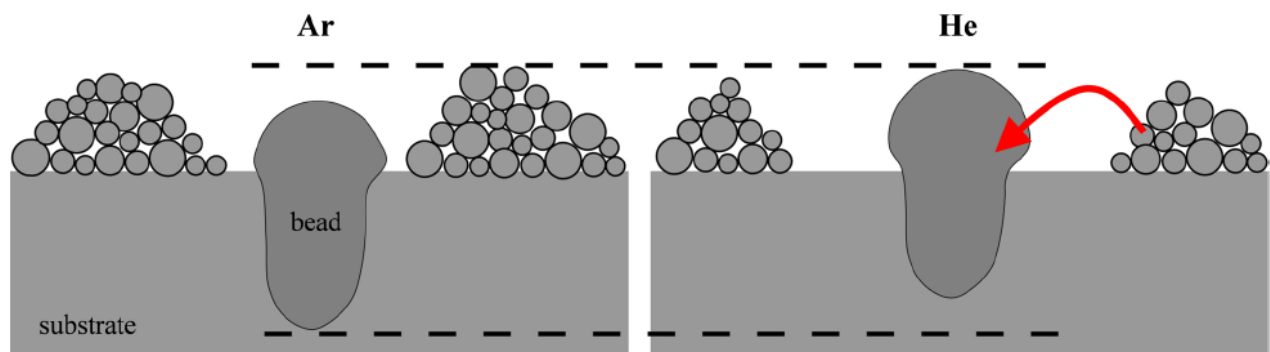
Weld pool cross-sections for various laser heat inputs in (a) pure argon shielding and (b) pure helium shielding. Adapted from [8]
